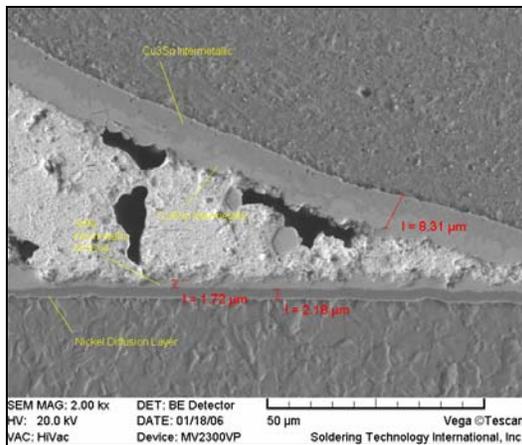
Image showing fractures between Cu/Sn intermetallics and solder alloy.
